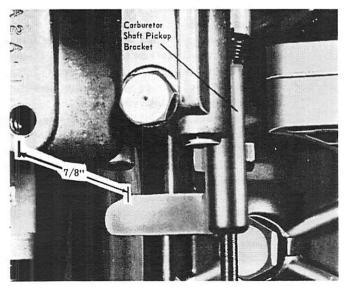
Carburetor Shaft Reverse Pickup Bracket Adjustment
